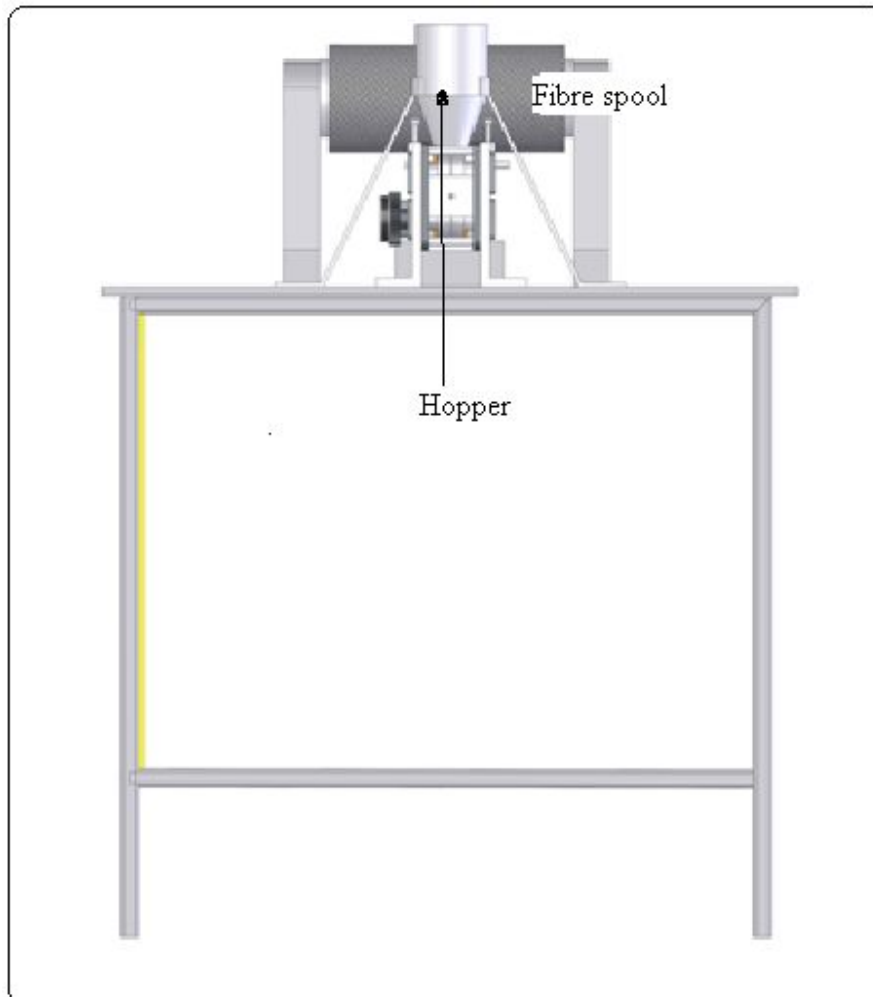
(b) Front view showing the first stage of operation of the machine
